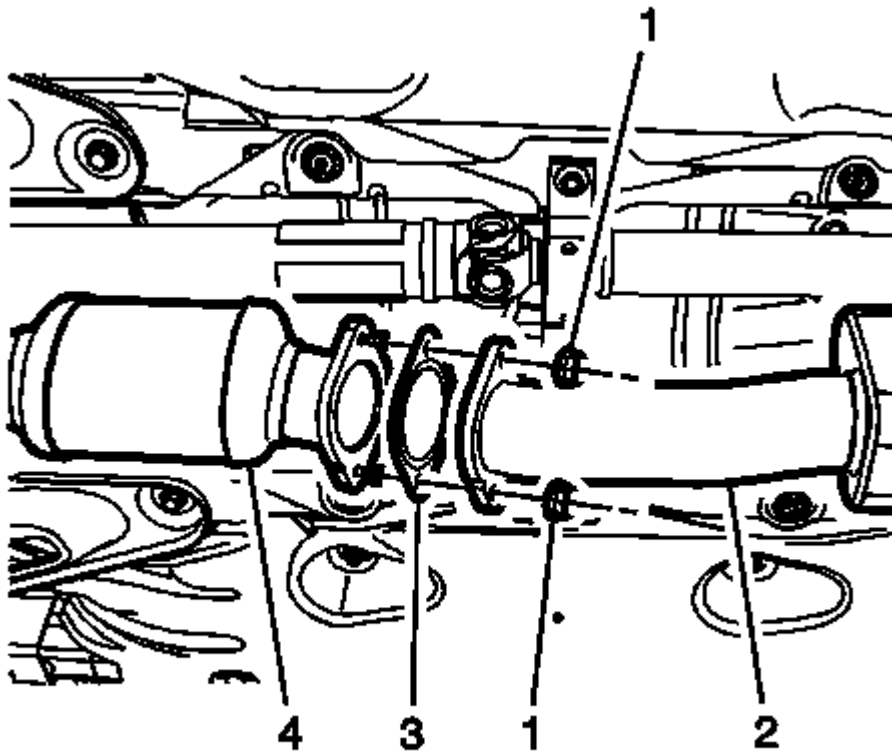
Fasteners Securing Rear Muffler To Exhaust Front Pipe
